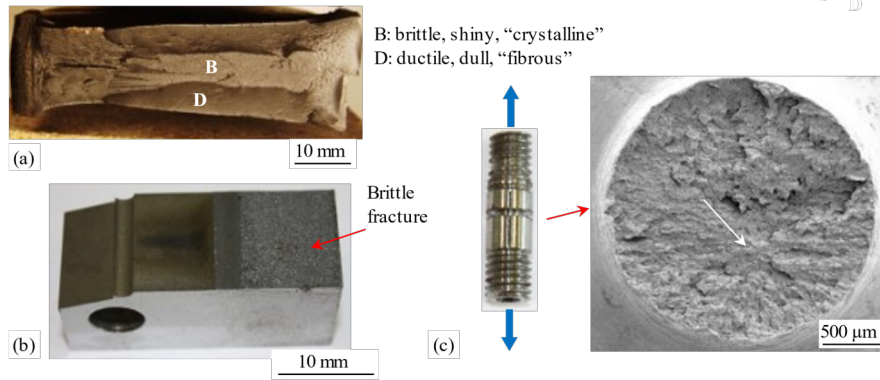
Macroscopic view of fracture surfaces of low alloy steels. (a) Battelle drop weight tear test specimen, low alloy steel, after [Tankoua Yinga, 2015]; (b) fracture toughness specimen; (c) axisymmetric notched specimen, after [Tankoua Yinga, 2015]. The white arrow in (c) points toward the fracture initiation site.
